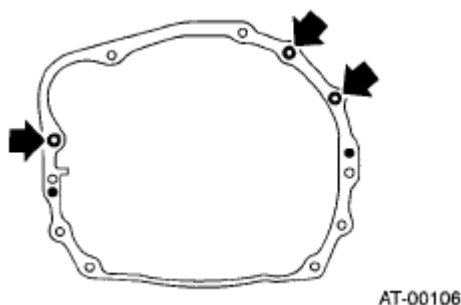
Locating Upper Side Of Transmission To Engine Bolts - AT Model
